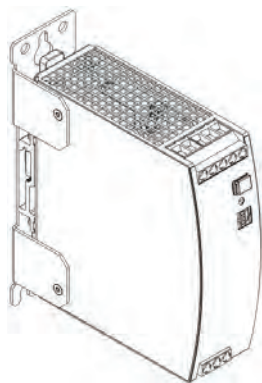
Right Isometric View of the Wall/Panel Mount Bracket.
